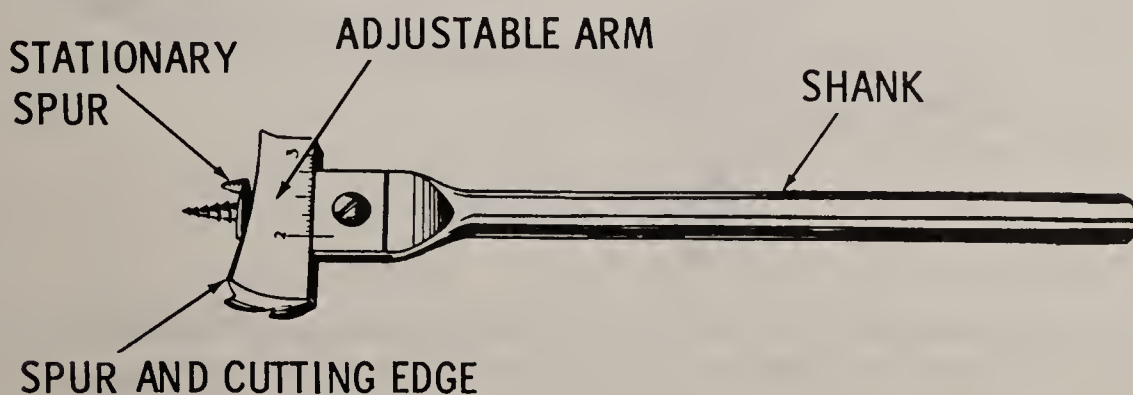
Typical expansive auger bit with adjusting screw. The expansive bit takes the place of many larger bits. The cutter may be adjusted for various size holes. Moving the cutter adjusting screw one complete turn enlarges or reduces the hole $\frac{1}{8}$ in. For correct setting, test for size on a piece of waste wood. For boring through it is advisable to clamp a piece of waste wood on the back of the work to prevent splitting.
